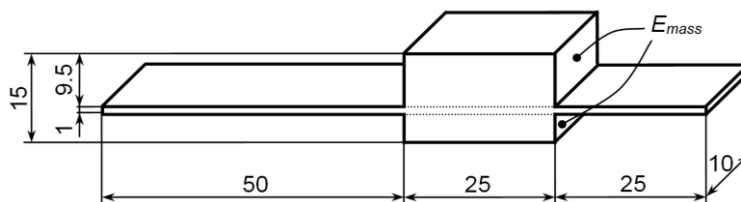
Sketch of the beam structure considered as case study in Section 3 (dimensions in mm).
